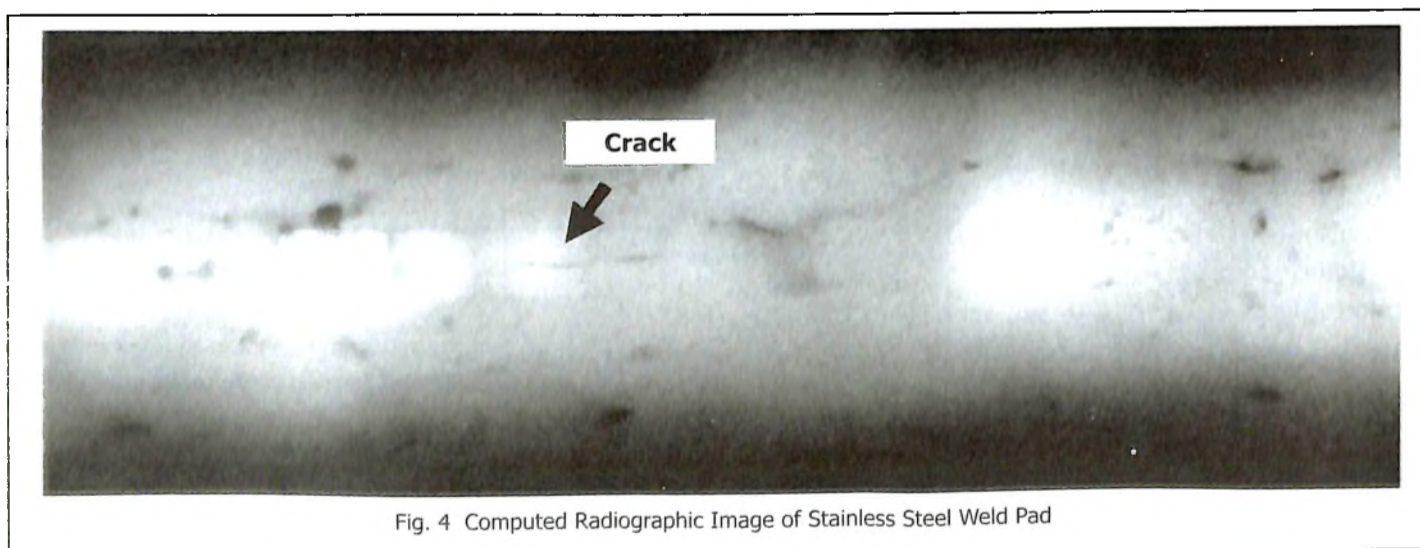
Computed Radiographic Image of Stainless Steel Weld Pad
